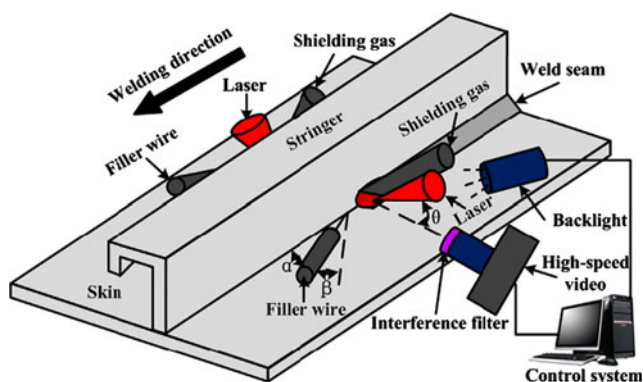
Schematic setup for a typical double-sided fiber laser welding with filler wires [133]
